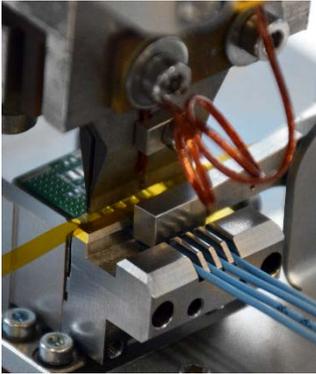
Showing optional Kapton feeder (manual or automated) to help protect the hot bar from solder and flux residues when the hot bar makes direct contact to the solder joints.
